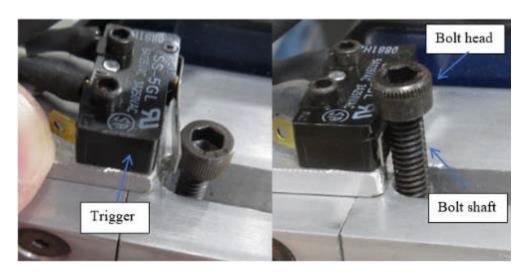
Bolt Head (left) Versus Shaft Contacting Switch (right)
